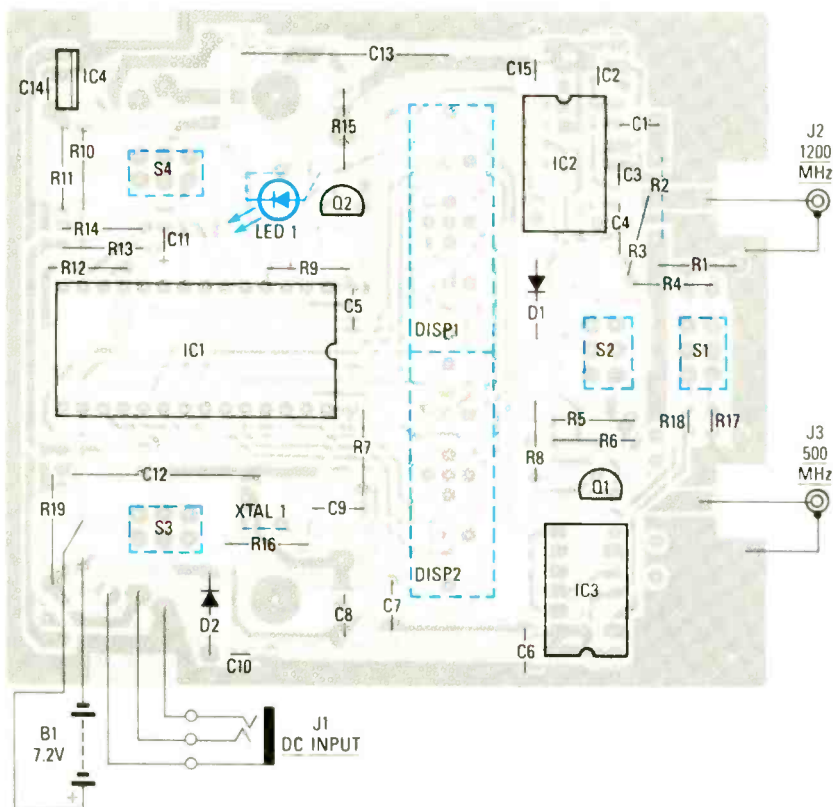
PARTS PLACEMENT DIAGRAM. Most components mount on the bottom of the board. The switches, displays, R2 and LED1 are shown in dashed lines; they should be mounted on the opposite side of the board. The leads to the battery attach to the bottom side; BNC jacks J2 and J3 should be soldered to both sides of the board.
